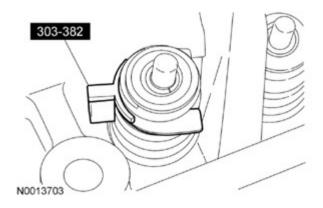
Installing Valve Stem Seal Courtesy of FORD MOTOR CO.
